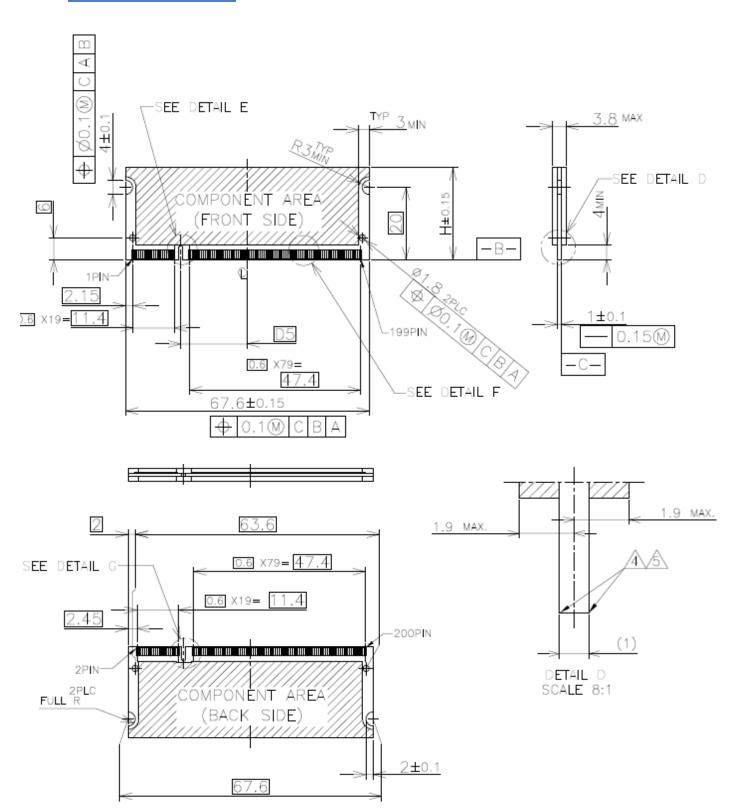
SOMDIMM-LPC3250 Mechanical Details
